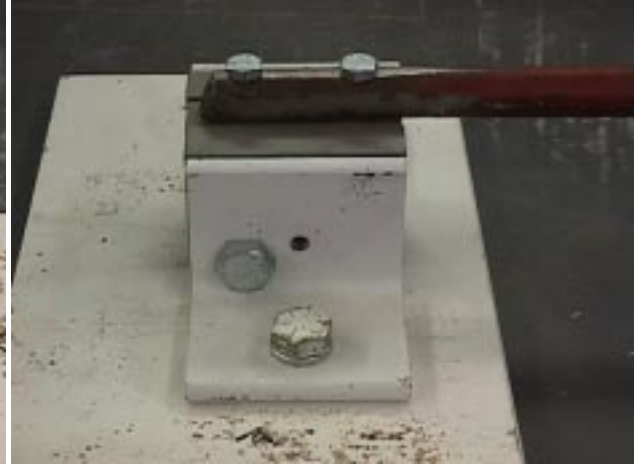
The left side of the shear showing the piece of steel angle that was drilled, 1) for the pivot bolt, 2) to allow the rod to be inserted into the shear (center hole visible in photo), and 3) to allow the shear to be bolted to a steel plate.
